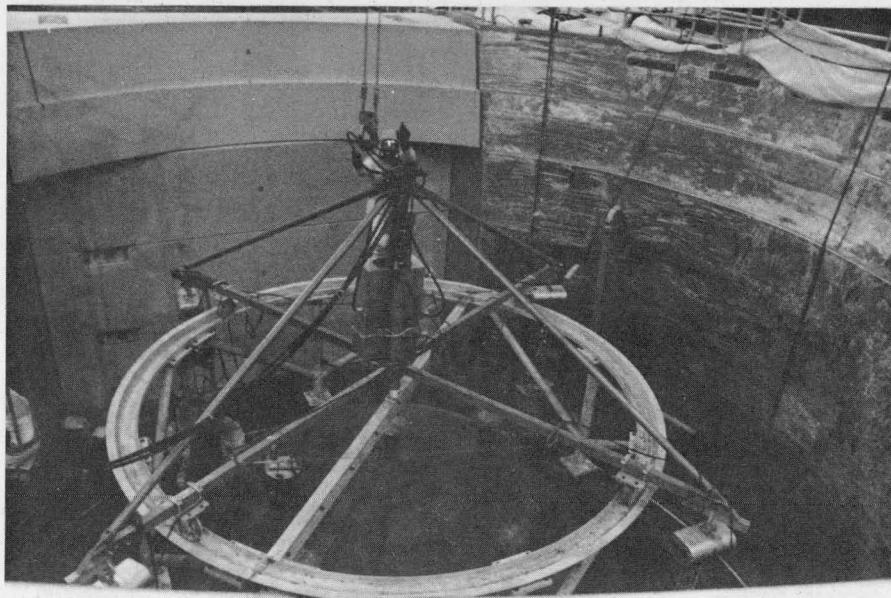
RPV Head Nut Removal Tool on Spider (Browns Ferry)
